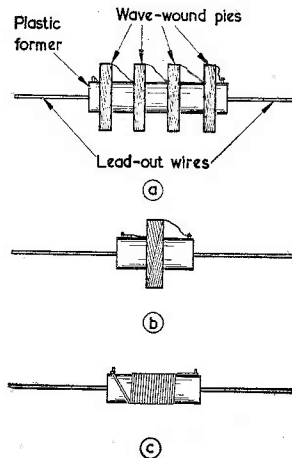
Representative examples of r.f. chokes. A choke with four wave-wound pies is shown in (a), a single-pie choke in (b) and a single-layer choke in (c).
